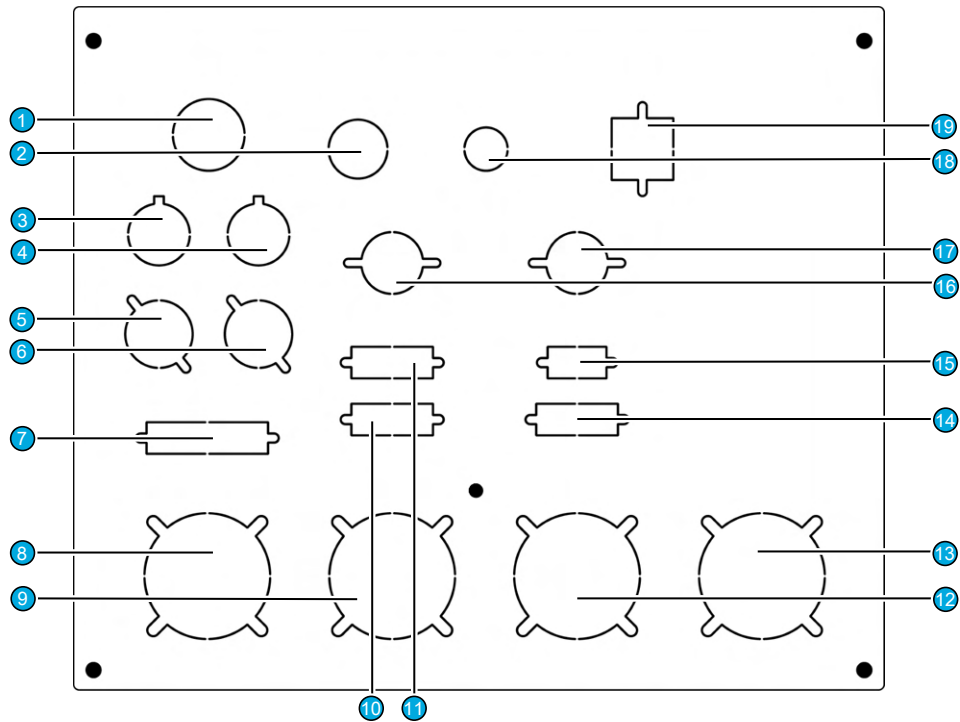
Connections / Interfaces - Machine Frame - away from CrimpCenter
